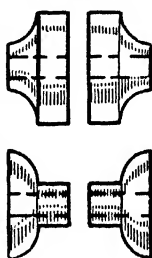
SINGLE-SIDED WHEELS FOR FORMING CURVED AND TAPERED MOULDINGS
